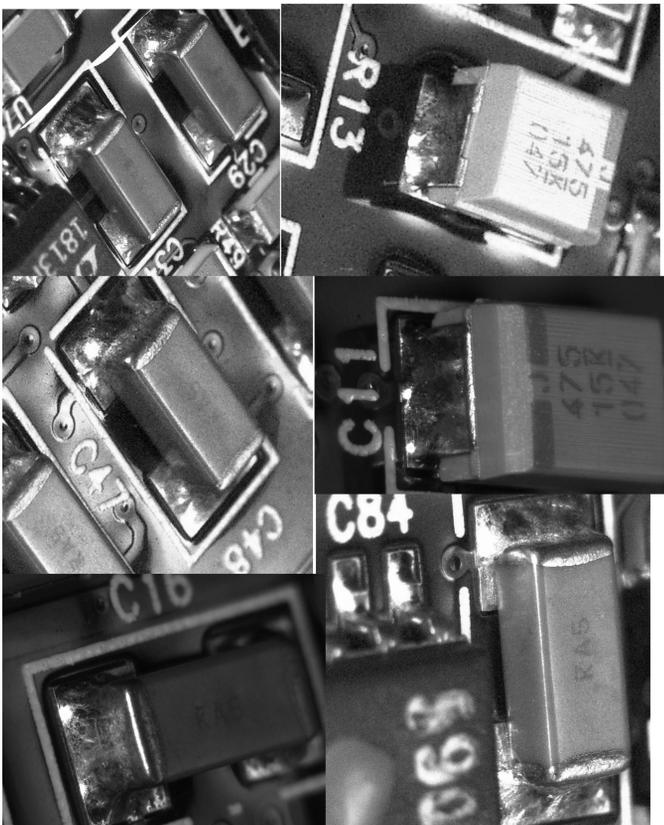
Photographs of the capacitor solder joints and resistor solder joints taken after 1005 thermal cycles.
